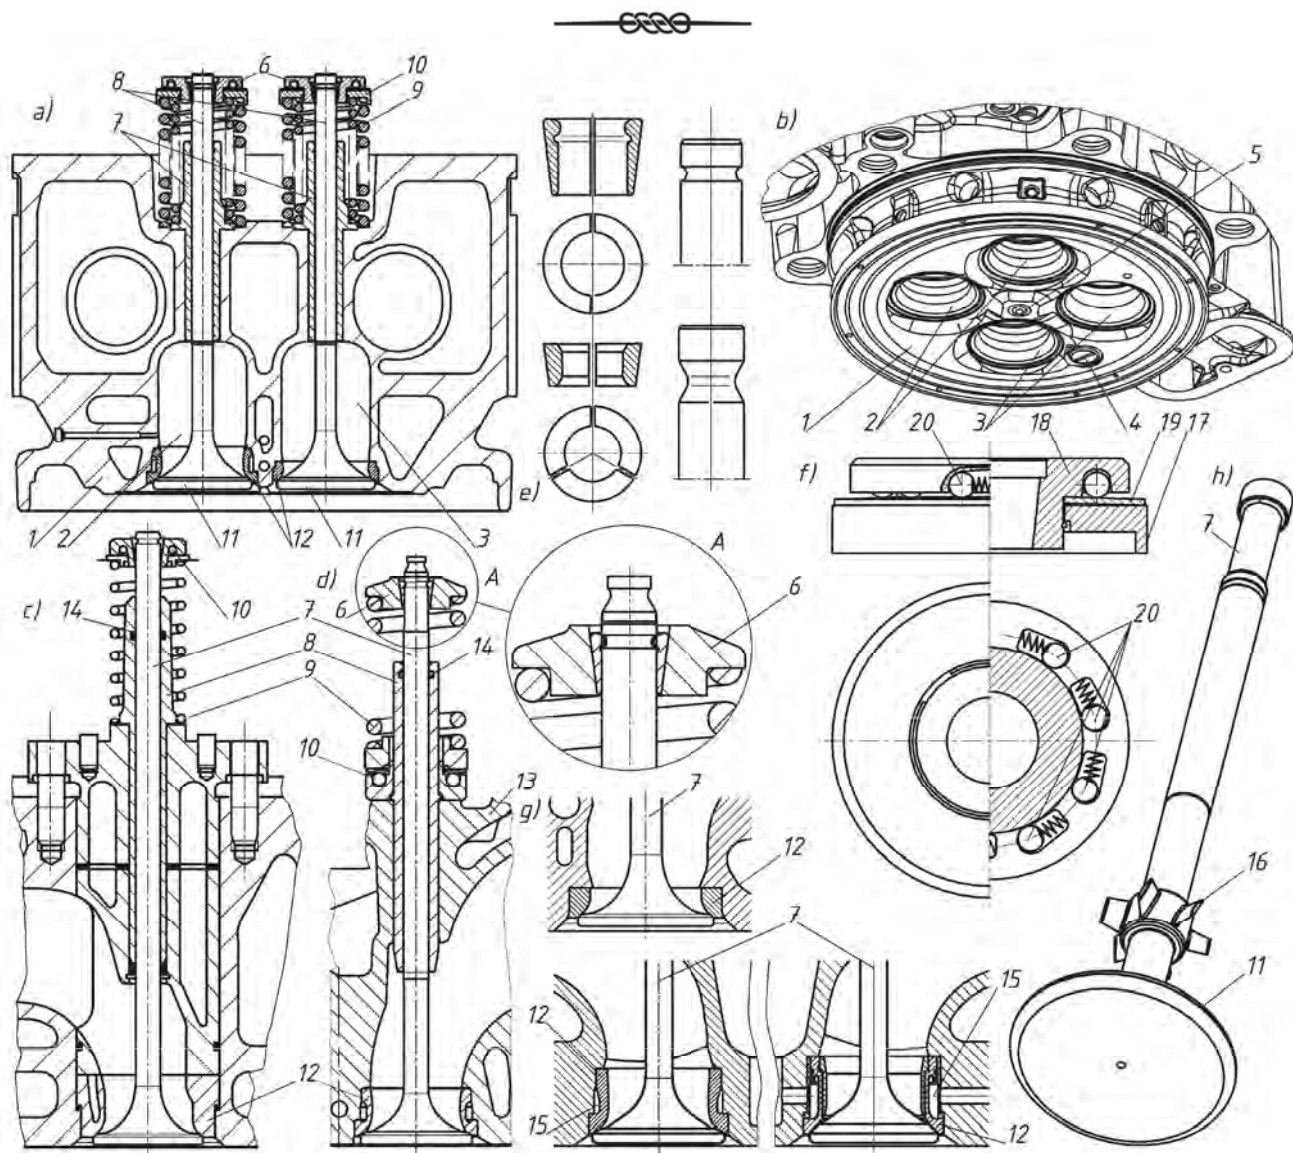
Valve gas distribution mechanisms and their elements: *a* – cylinder cover with suspended valves of the 46 series diesel engine from Wärtsilä; *b* – fire bottom of the MaK 43C diesel engine with valve sockets; *c* – plug-in valve housing for diesel engine TBD 645, Deutz MWM; *d* – valve assembly of the MaK 25C diesel engine; *e* – conical cotters for fastening the upper valve plate; *f* – device for turning the «rotocap» valve; *g* – plug-in valve seats; *h* – exhaust valve of MAN K98MC-C diesel engine.: 1 – firing bottom; 2 – exhaust valve sockets; 3 – intake valve sockets; 4 – start valve; 5 – fuel injector spray tip; 6 – upper valve plate; 7 – valve stem; 8 – valve guide bushing; 9 – spring; 10 – rotocap; 11 – valve plate; 12 – valve seat; 13 – cover housing; 14 – sealing ring; 15 – water cooling cavity of the exhaust valve seat; 16 – impeller; 17 – rotokap stator; 18 – rotokap rotor; 19 – conical spring washer; 20 – spring-loaded balls (adapted from [7, 12, 13, 14, 15])
